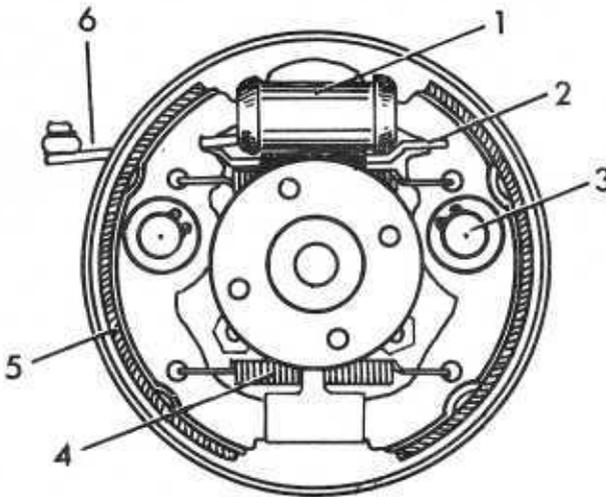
View of the assembled rear brakes. Shown is the version fitted to models prior to December 1976. The brake shoes of the new Fiat 126 are attached with steady pins, springs and washers to the brake back plate and the hub has cut-outs to facilitate the removal of the shoes.
